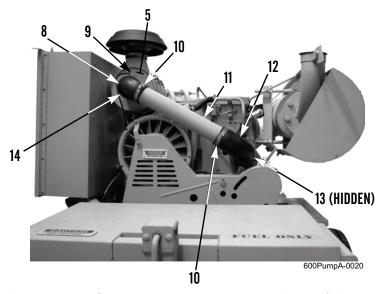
Air Cleaner Housing Assembly - Front of Engine.
